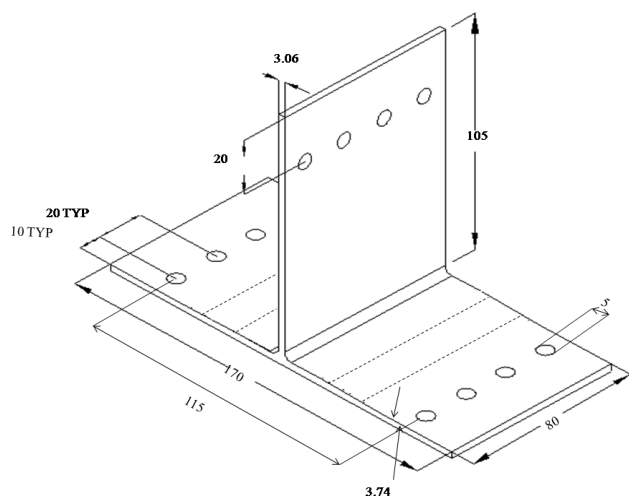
Isometric view of the T-joint specimen (all dimensions in mm)
